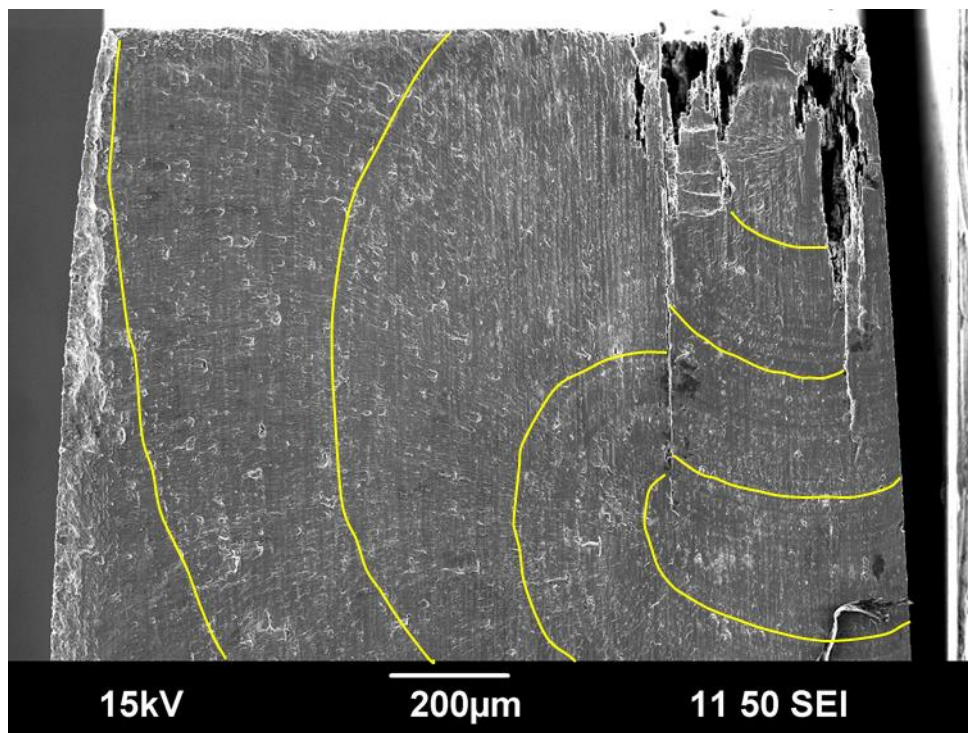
Fracture surface of P3-IG-03 showing 'tunnelling' where the IGC acts as a barrier to the fatigue crack front
